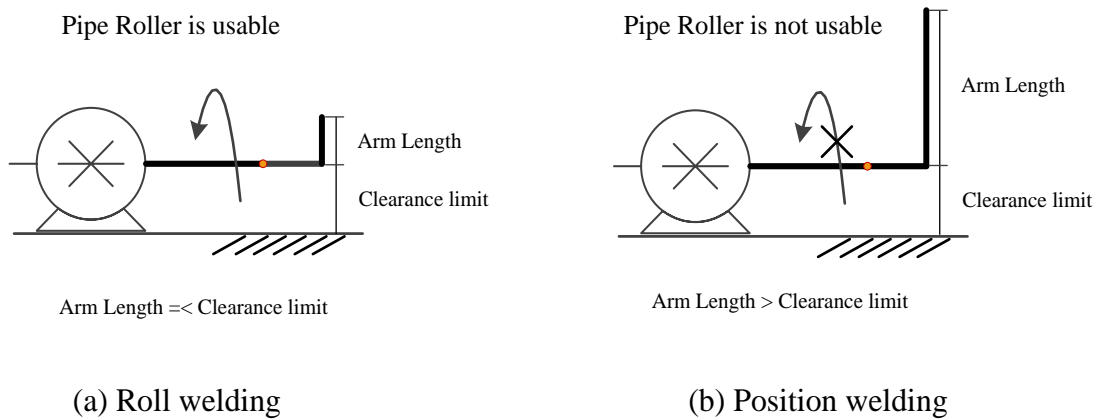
Roll welding and position welding (Hu and Mohamed 2012)
